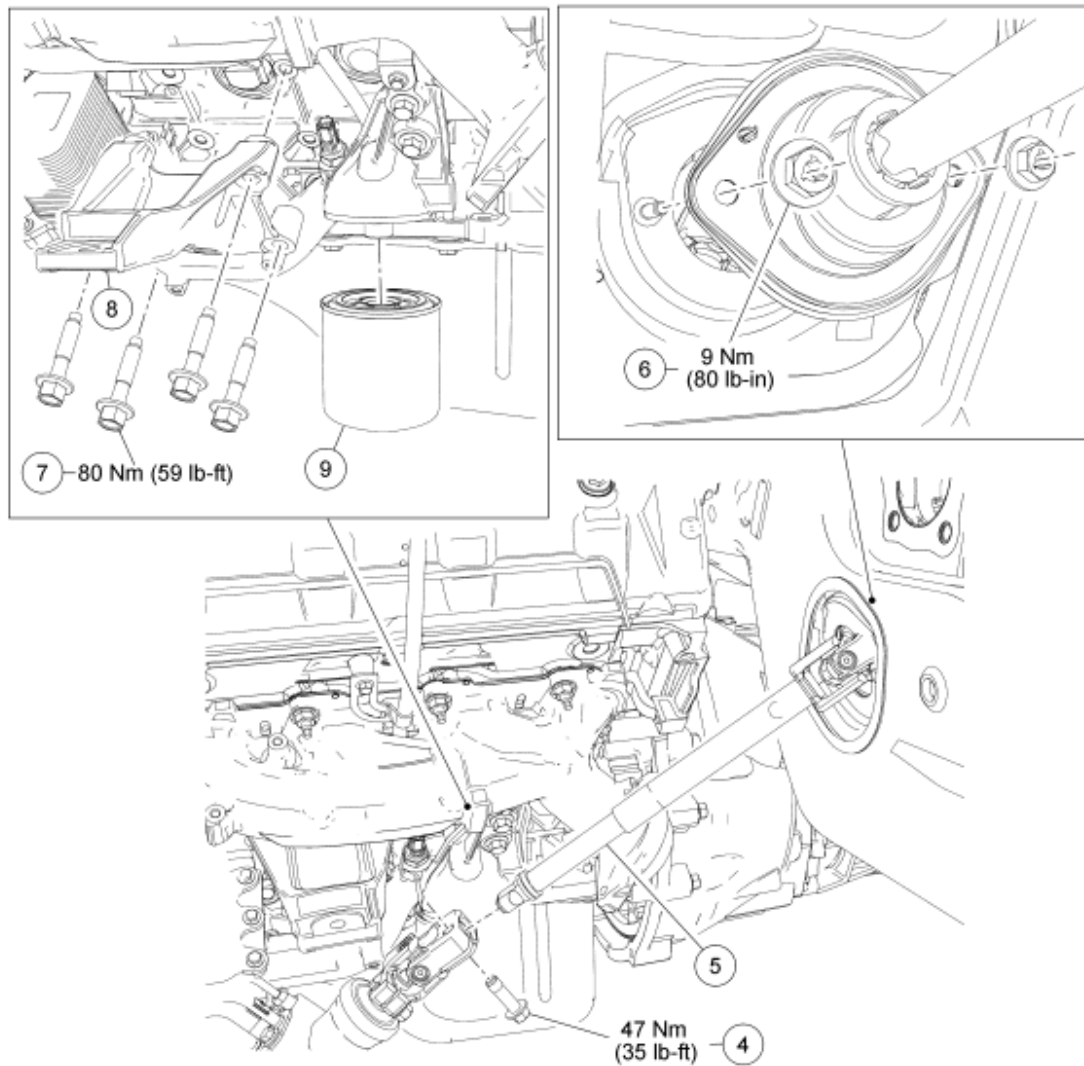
Exploded View Of Engine Support Insulators With Torque Specifications (1 Of 3)
